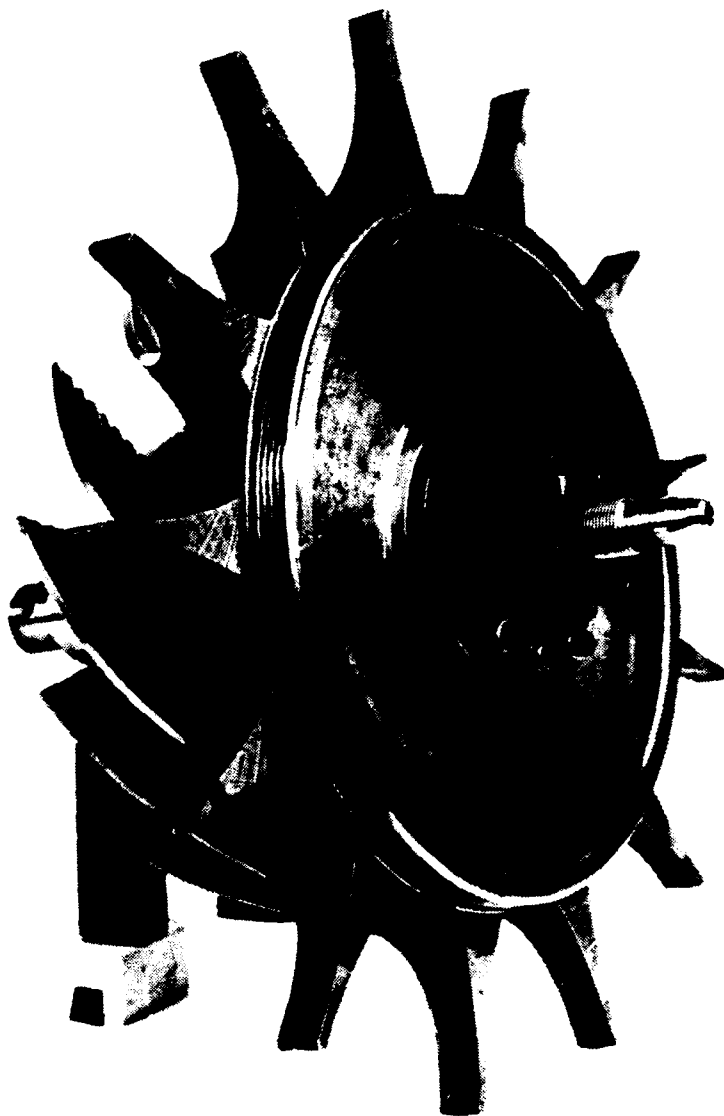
AIR-COOLED ROTOR - POST SPIN TEST
